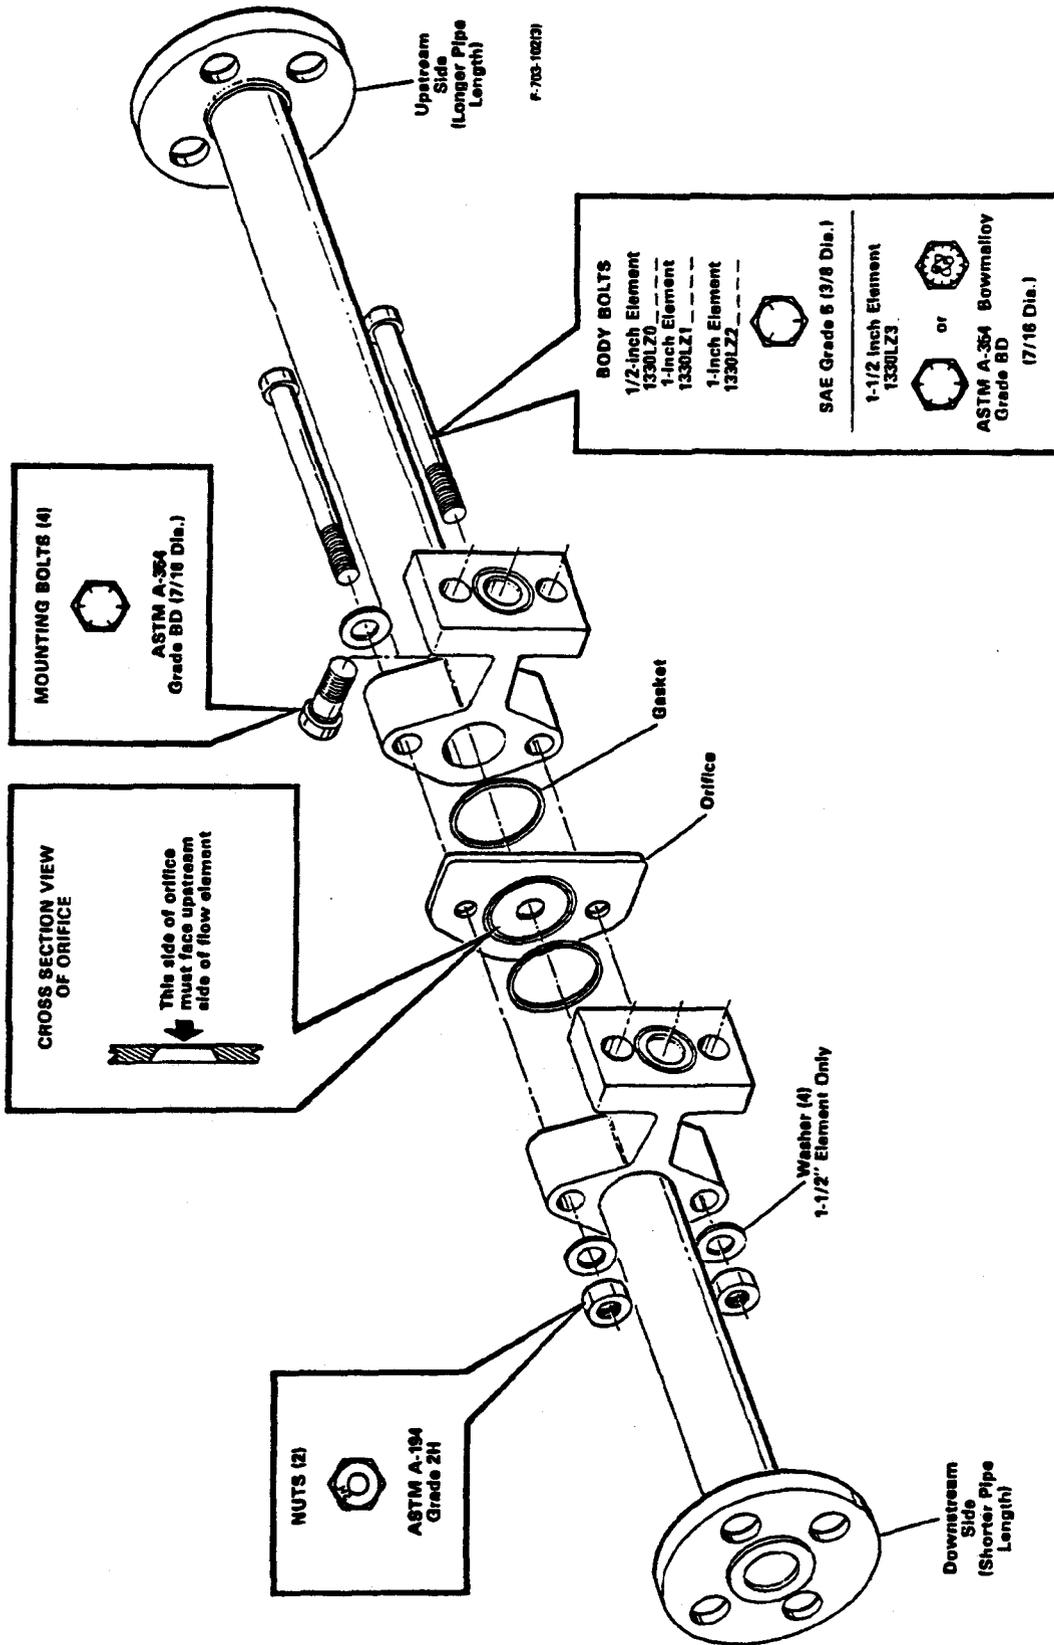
Exploded View of Flow Element with Upstream and Downstream Piping
